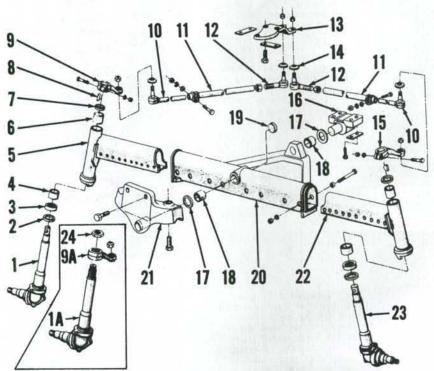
Exploded view of row crop type wide adjustable front axle. All purpose type front axle is similar except that center member (20) is reversed to provide shorter wheelbase. Note that later models are equipped with spindles (1A) and steering arms are retained by a nut as shown in inset. All parts except center steering arm (13) and inner tie-rod ends (12) are interchangeable between row crop and all purpose types. Refer to Figs. 2 and 3 for center steering arm views.
